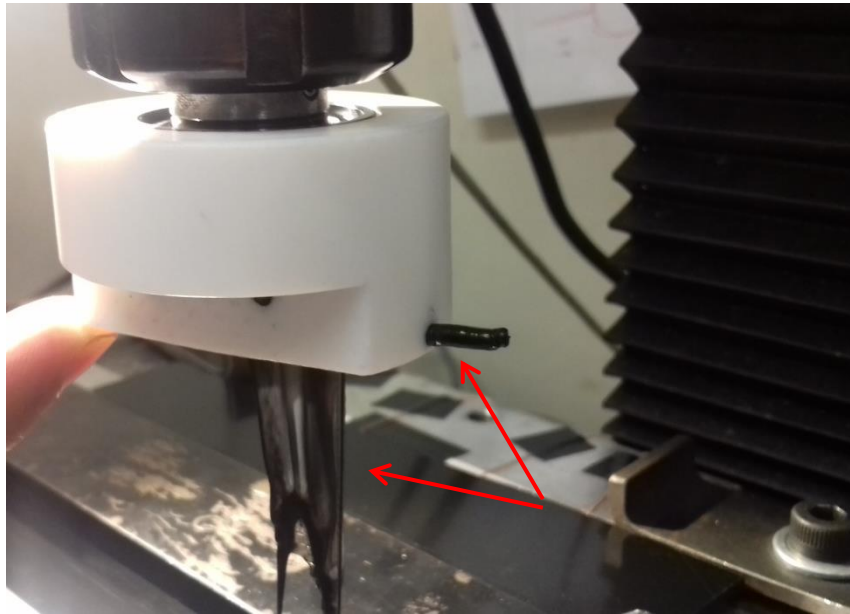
Molten plastic that leaked the weld bead through the Teflon shoulder.
